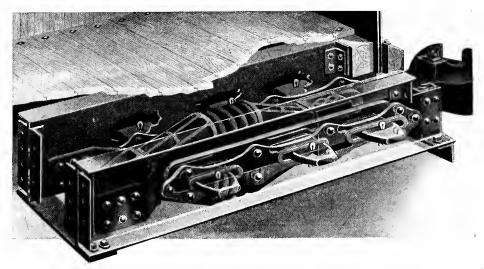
Farlow Draft Rigging with M. C. B. 8 in. by 77% in. Twin Springs. T. H. Symington Company.
